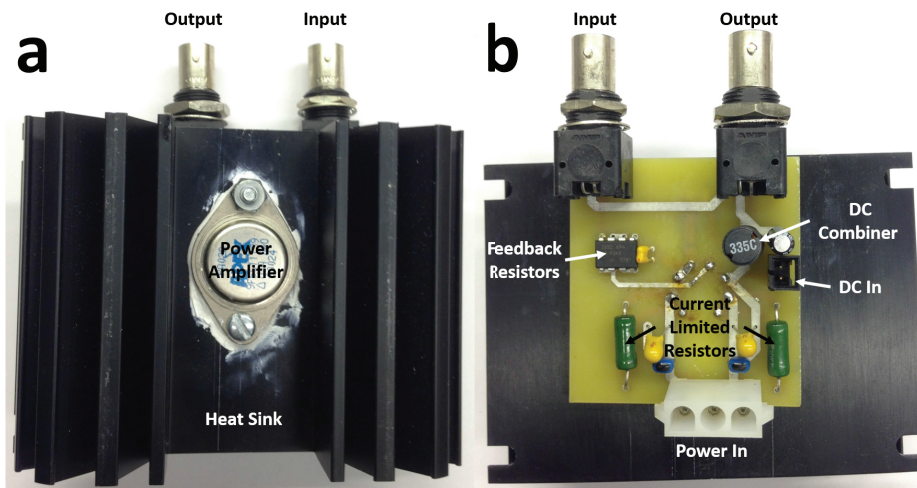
Photos of PCB board of the tunable filter driver; (a) front side and (b) back side.
